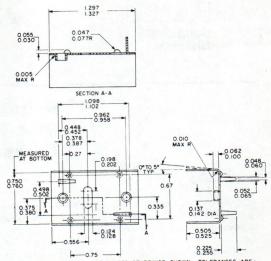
Dimensional outline of Versawatt transistor package designed for mounting on printed-circuit boards.
